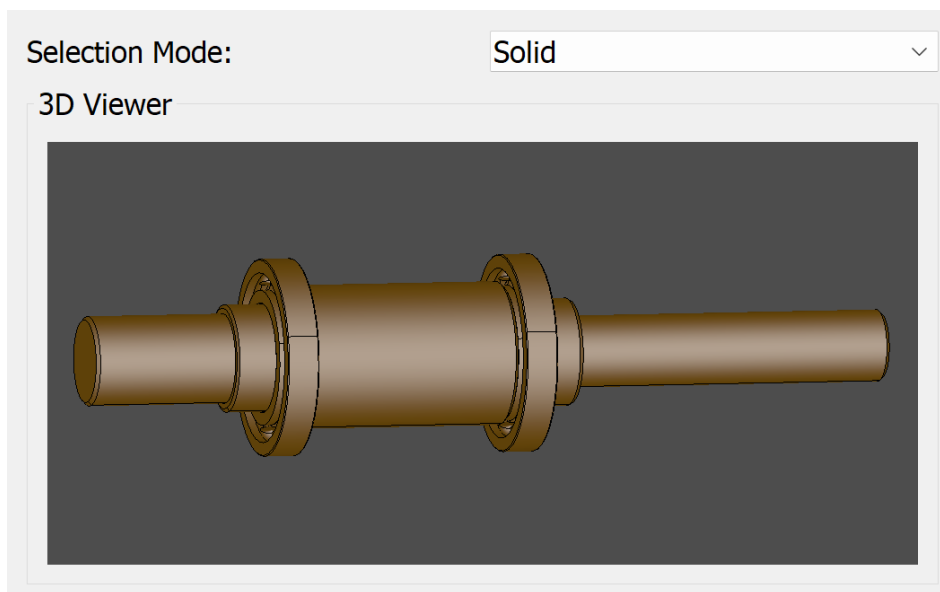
Result 3 - 3D model of a shaft with chamfers and ball bearings.
